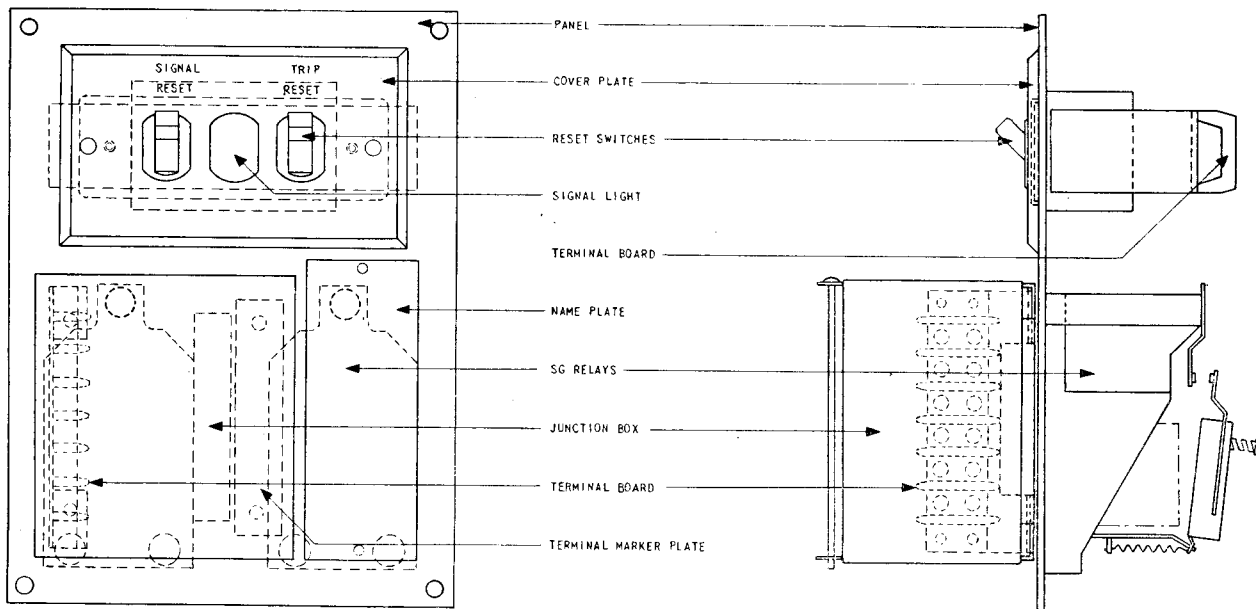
ASSEMBLY OF THE TRA RELAY CONTROL PANEL
